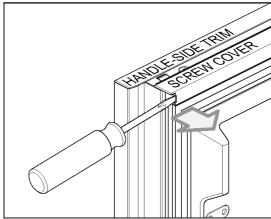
B. Screw Cover Removal with Handle-Side Trim
